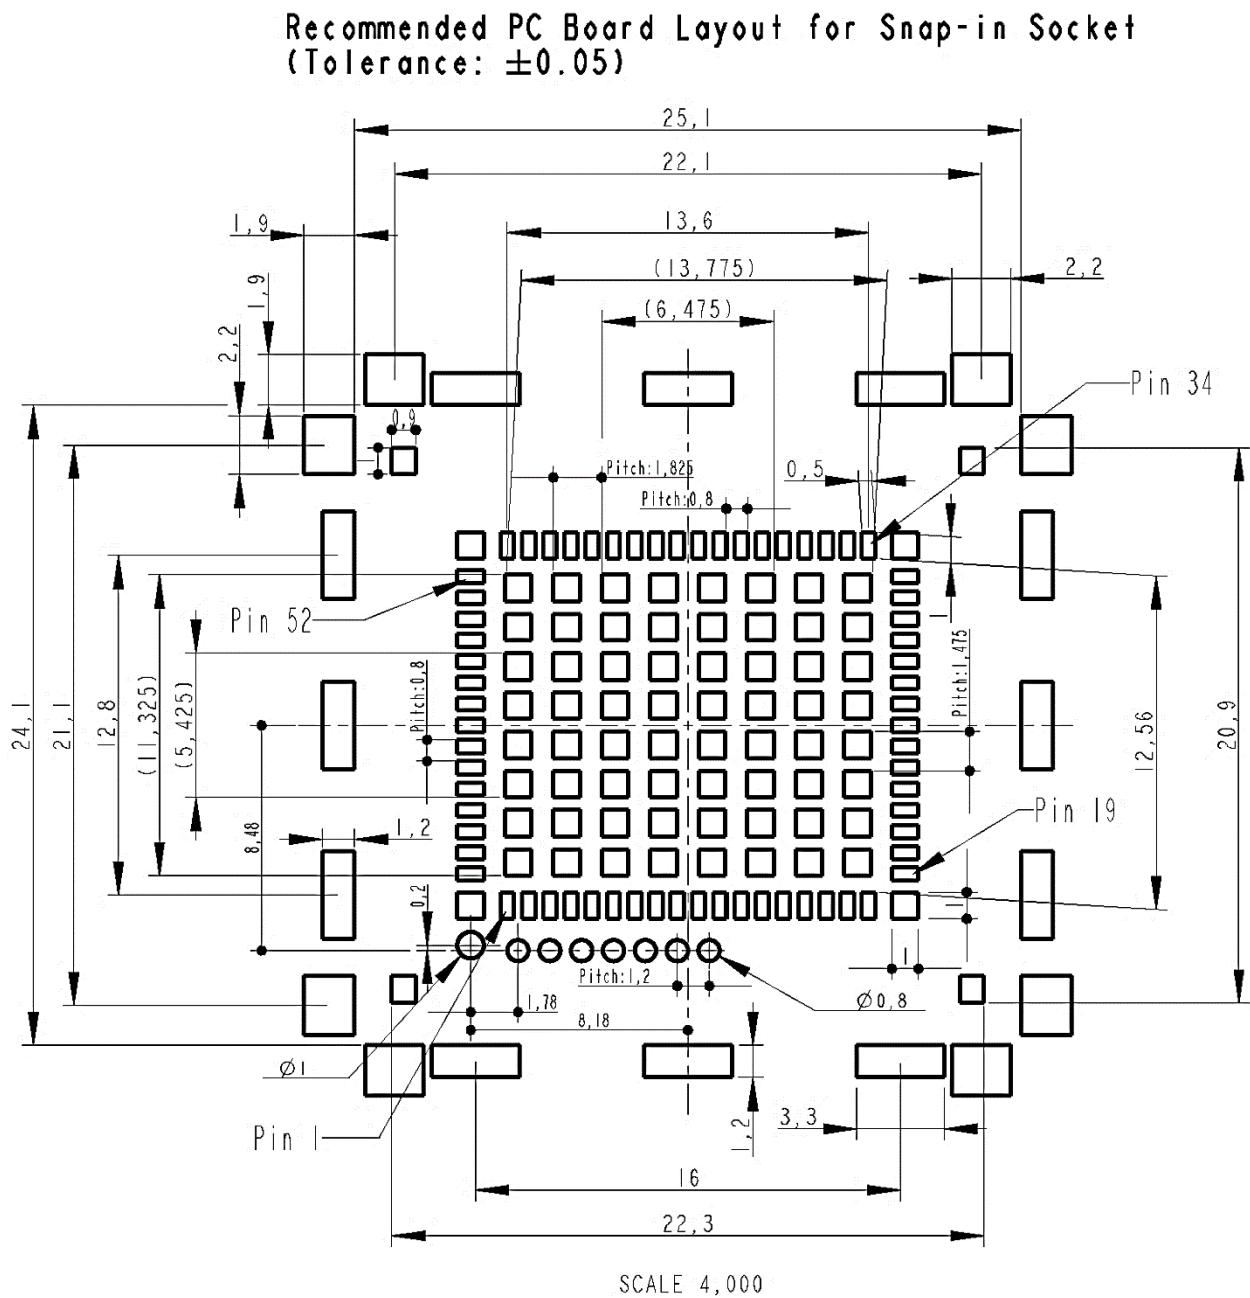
Recommended HL Series Snap-in Socket Footprint – Copper Layout Position
